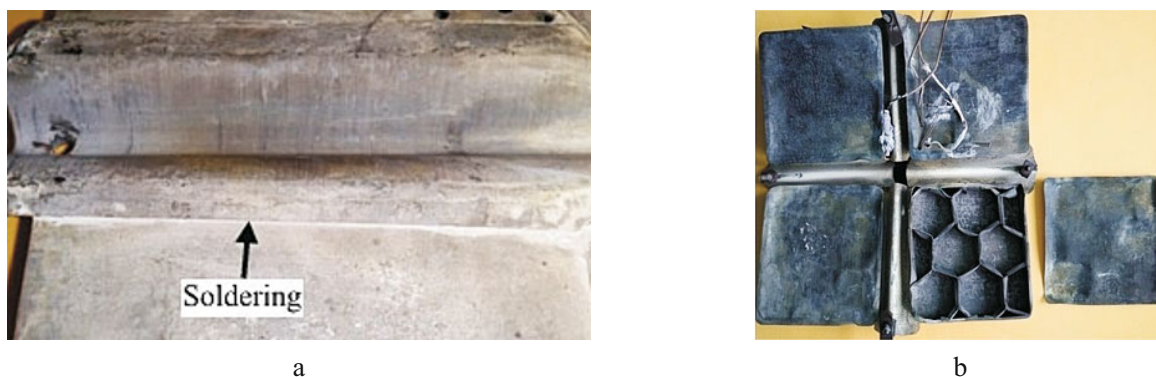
The HPS prototype after two cycles of thermal loading: (a) soldered joint; (b) diffusion welding joint.
